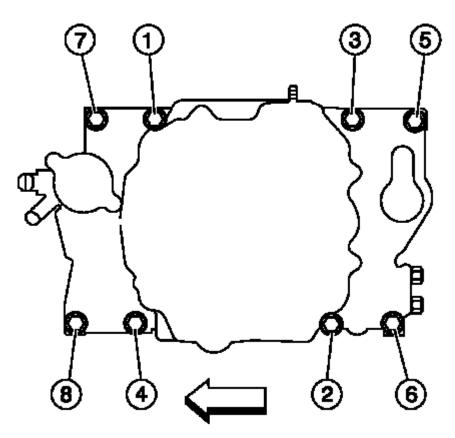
View Of Tightening Sequence For Intake Manifold Lower Bolts Courtesy of GENERAL MOTORS CORP.
